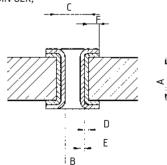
Schematic view of the circuit board's hole layout, 6 mm hole
